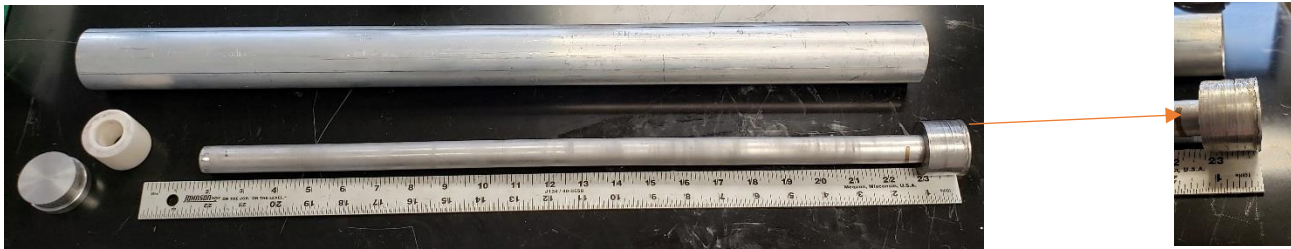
Location where the Al canister collapsed and subsequently broke from the weld.
